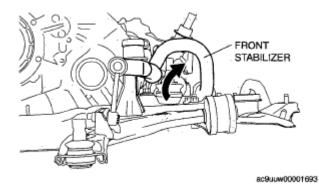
Rotating Front Stabilizer To Rear Courtesy of MAZDA MOTORS CORP.
